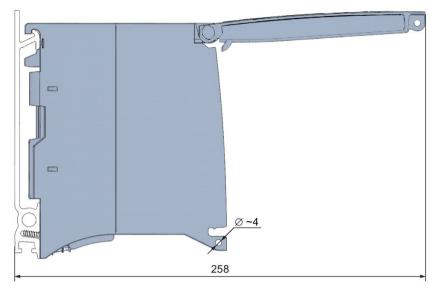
Dimension drawing CPU 1515R-2 PN, side view with open front panel
